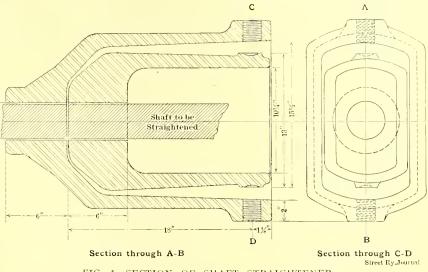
SECTION OF SHAFT STRAIGHTENER
